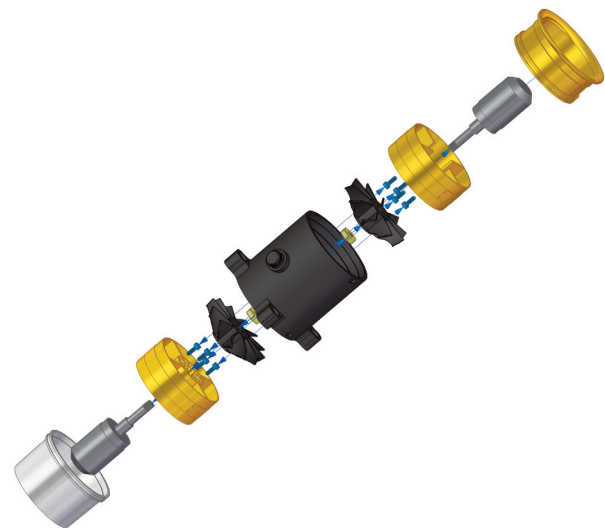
Tandem electric ducted fan (EDF) motor assembly.
